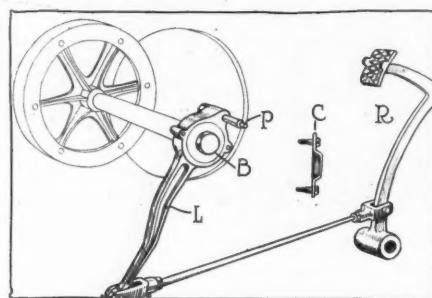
HOW A JACKSHAFT BEARING CAN BE MOVED TO GIVE FRICTION ADJUSTMENT
